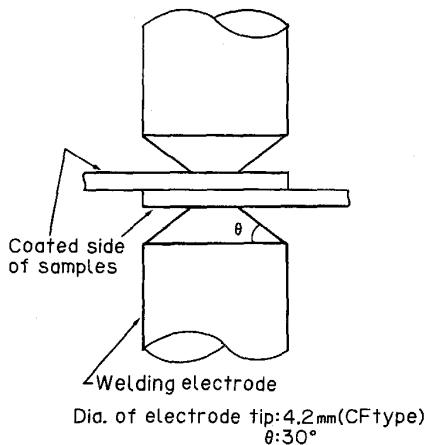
Shape of welding electrode and the method of welding.
